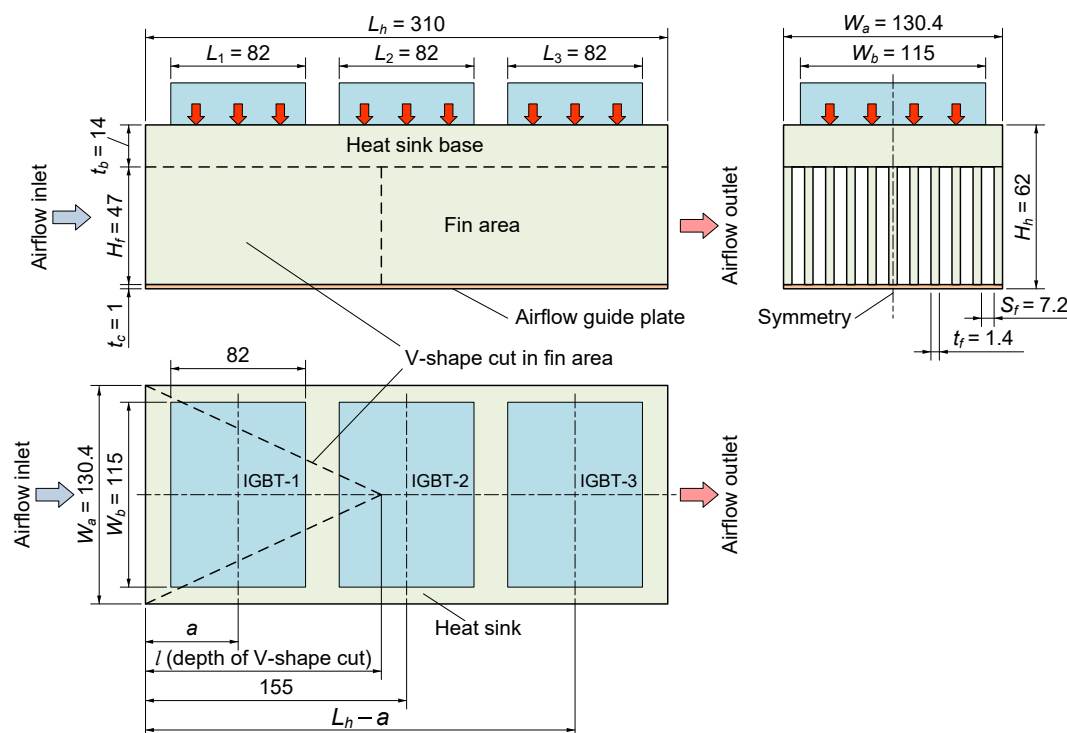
Schematic illustration of the proposed V-shaped cut applied to a conventional air-forced heat sink. The drawing shows the bottom view of the heat sink; the power modules attached to the heat sink base surface are not visible.
